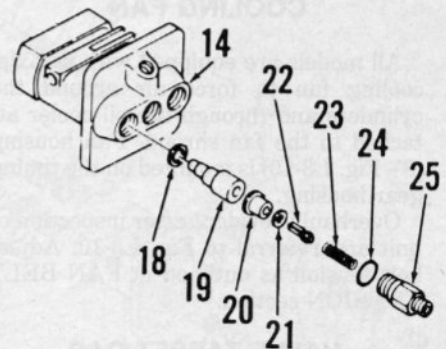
Partial exploded view of fuel injection pump used on all models except 834 and L54.
